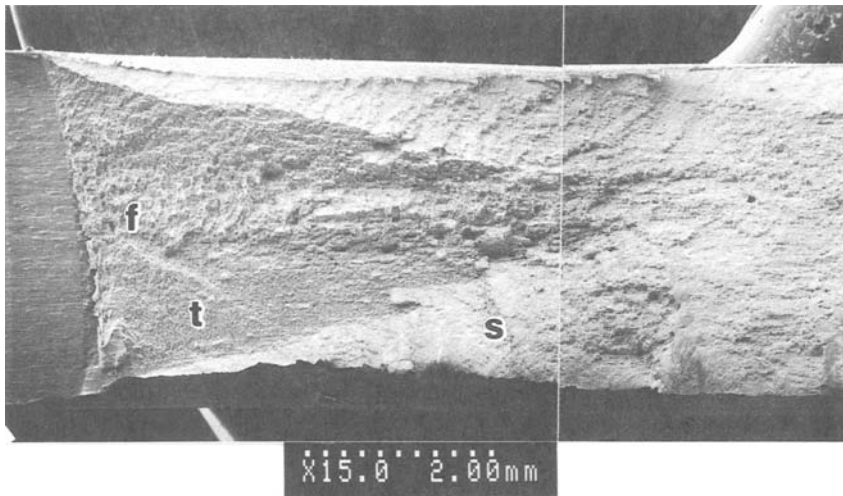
Scanning electron fractograph of burst test specimen from a tube of high toughness tested at 250°C showing narrow flat fracture zone at mid-section (f), wide cup-shaped transition zone (t), and slant fracture developing at surfaces (s) (Tilt angle view at 45°.)
